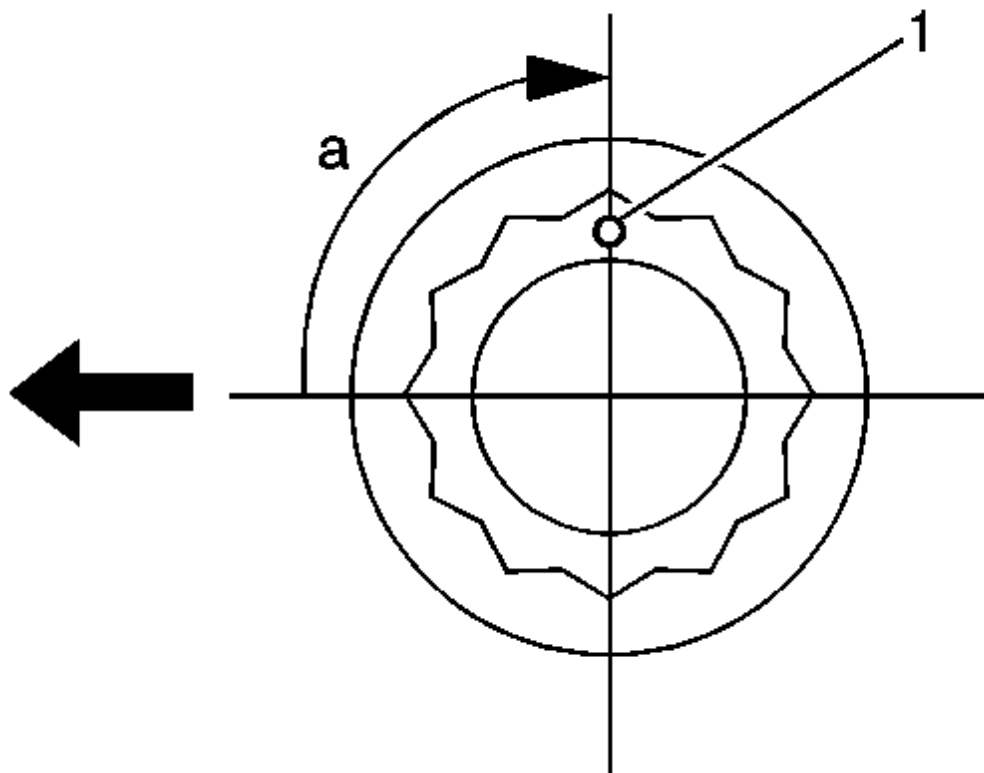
Identifying Connecting Rod Cap Bolt Tightening Final Step
